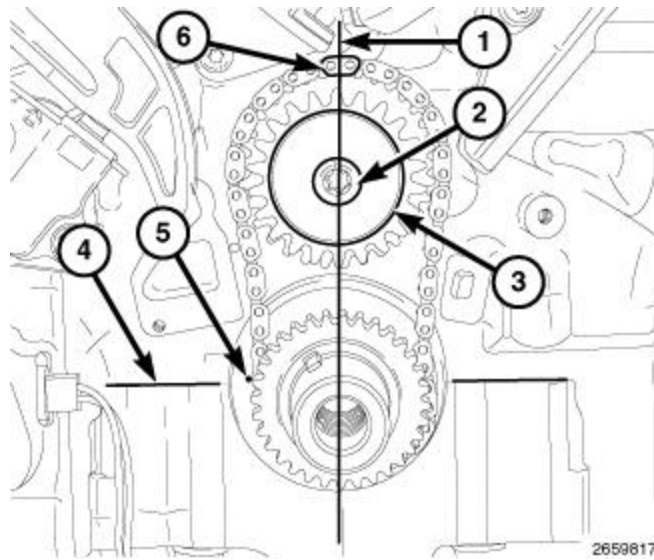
Timing Chain Plated Link At 12 O'Clock, Washer, Retaining Bolt, Block/Bearing Cap Junction & Dimple
